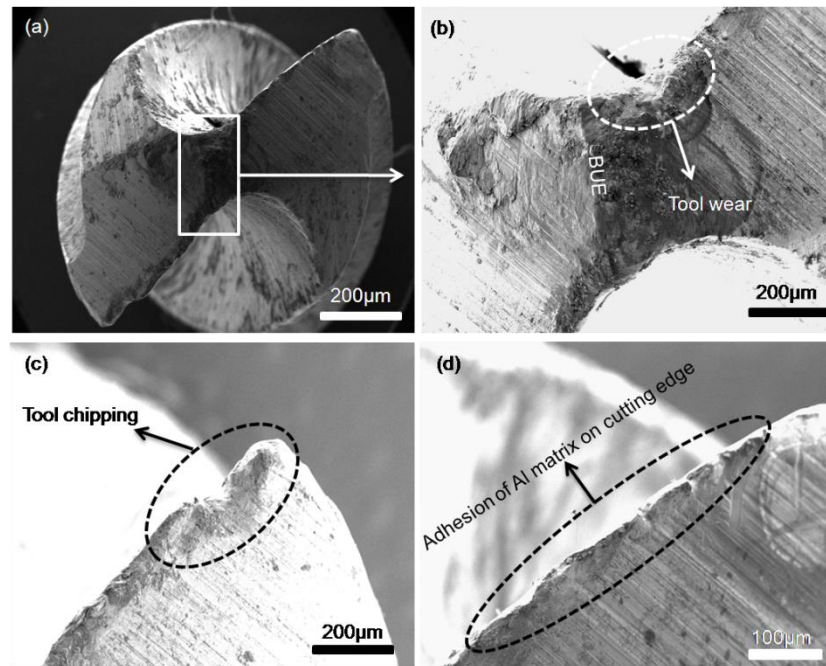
16 SEM images of worn-out tool (a) overall view after twenty drill tests, (b) BUE formation and tool wear, (c) tool chipping, and (d) adhesion wear.
